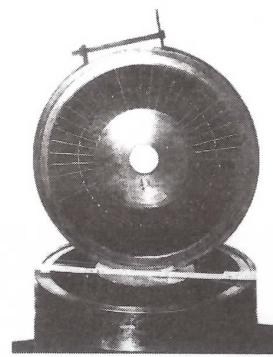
Impeller blades machined by E.C.M. process; (machined from a solid disc by trepanning, in which a hollow cathode is sunk into the part to form each blade. A single cathode is fed axially and the disc is indexed after each cut). This is called integral blade machining by ECM process.
